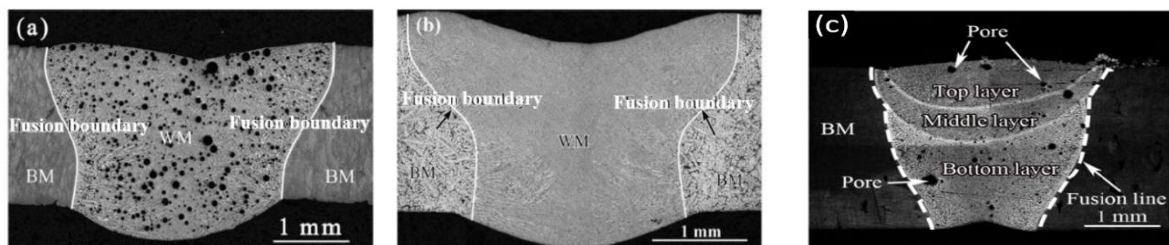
Cross-section of joints (a) laser welded PBF-LB/M/AlSi10Mg (b) laser welded cast AlSi10Mg (c) layer deposition welding of PBF-LB/M/AlSi10Mg [34]
